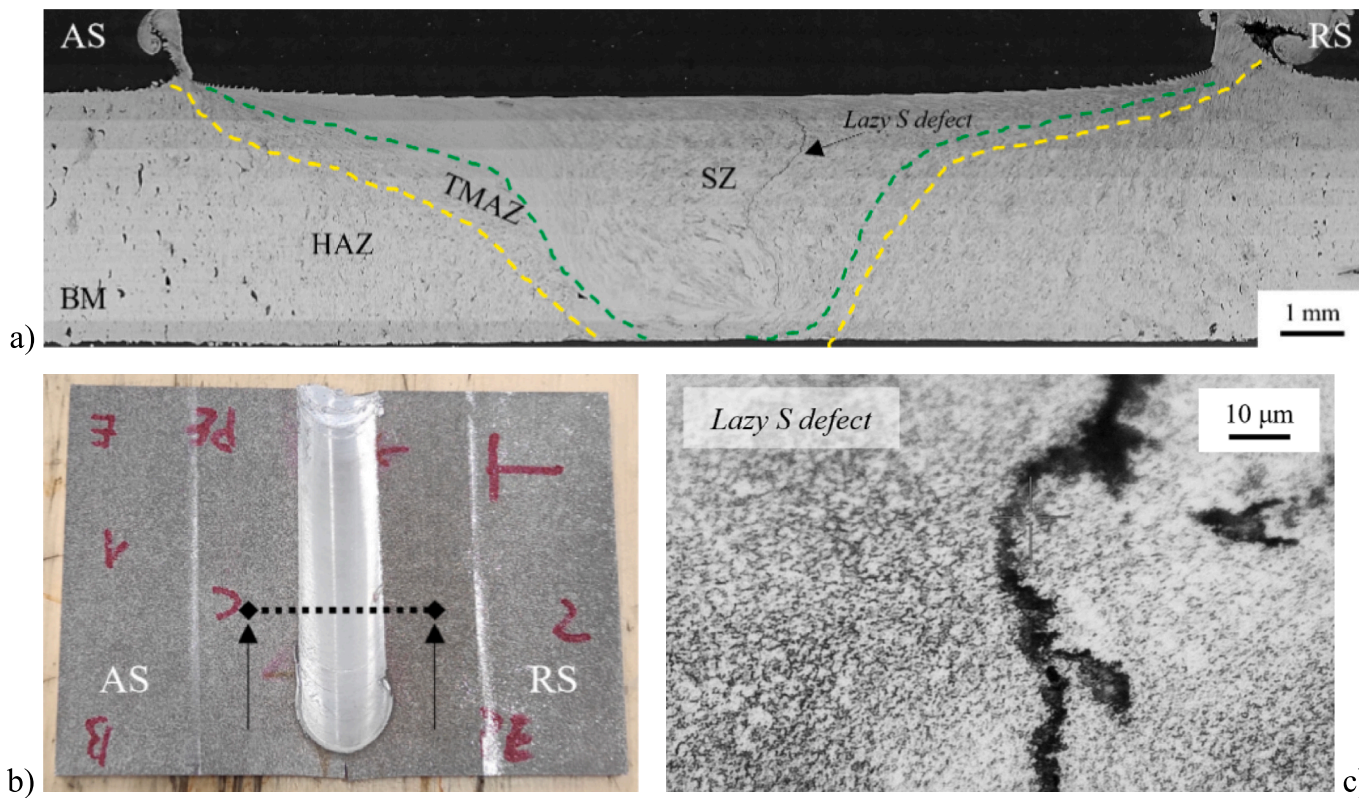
a) Typical cross-section of an FSW joint, b) top view of the welding seam where the metallographic sample was extracted (black arrows), and c) detail of the lazy S defect.
